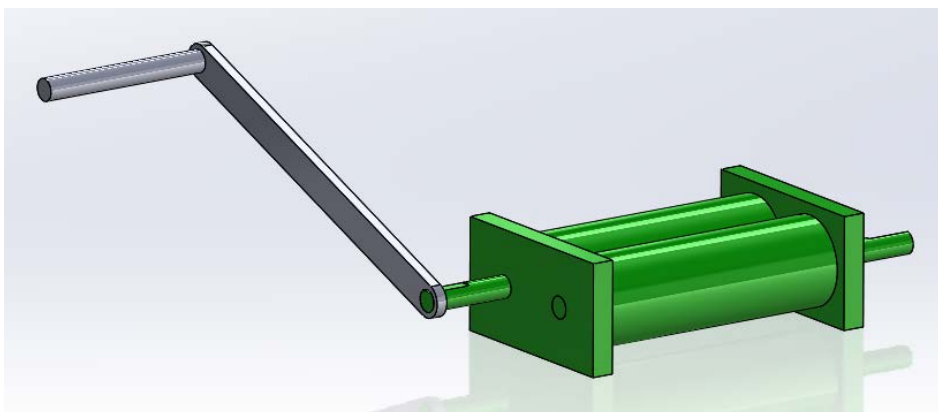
Roller and crank mechanism will grind the breadfruit into flour.
